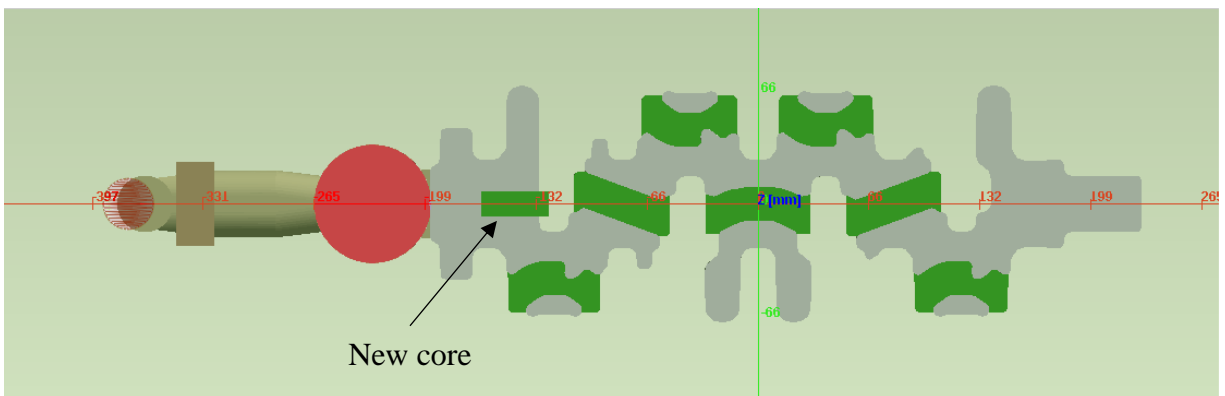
Crankshaft with new core in the rear main journal. Viewed from a horizontal midplane cut.
